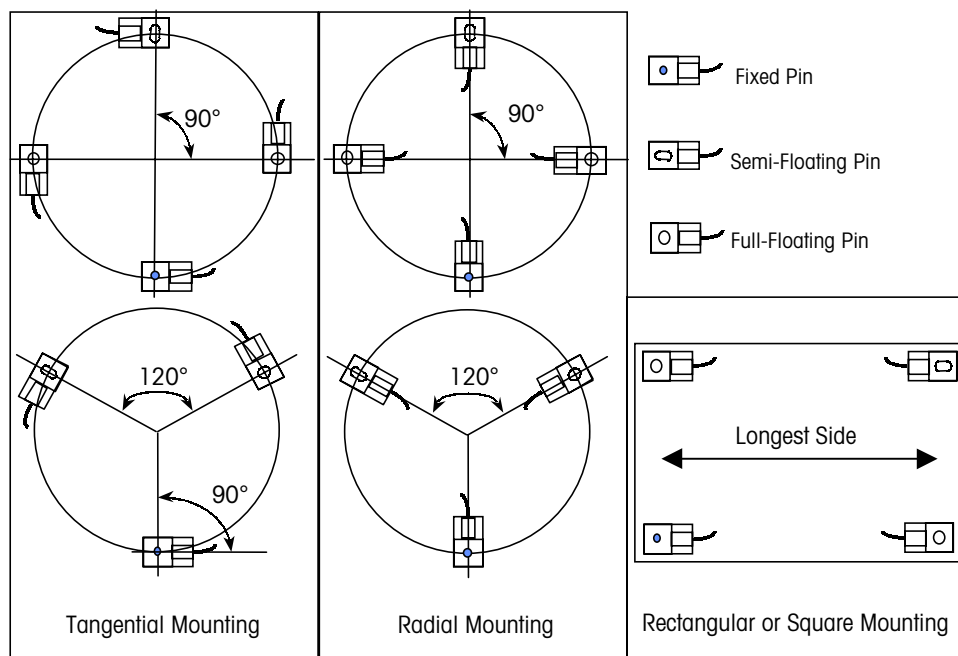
Plan View of Mounting Arrangements for Model 0958 Flexmount Modules
